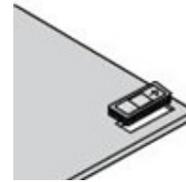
Attaching the LegaMove Touch Basic Inlay handset to the piece of furniture
